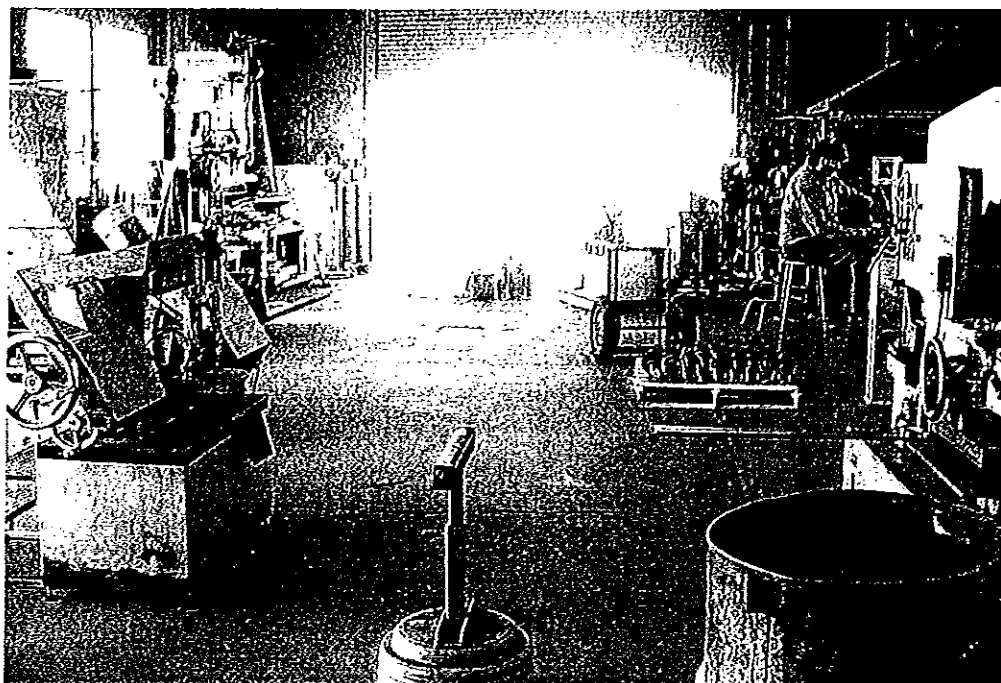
Interior view of the machine shop looking south toward the garage door at the south end of the building.
